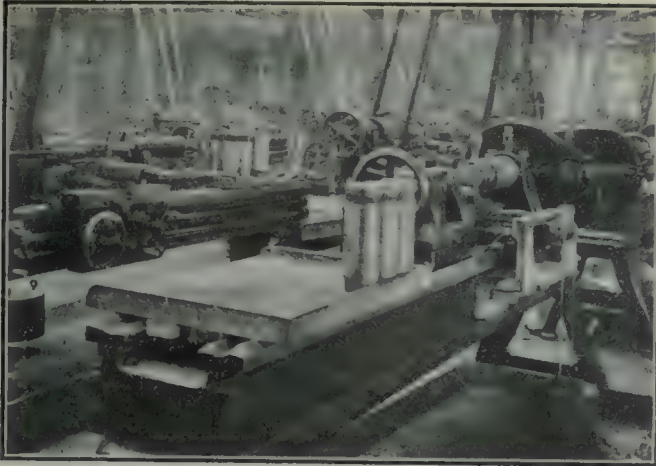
C.M.C. ENGINE LATHE AND AMERICAN ENGINE LATHE FITTED FOR FINISH TURNING SHELLS.
